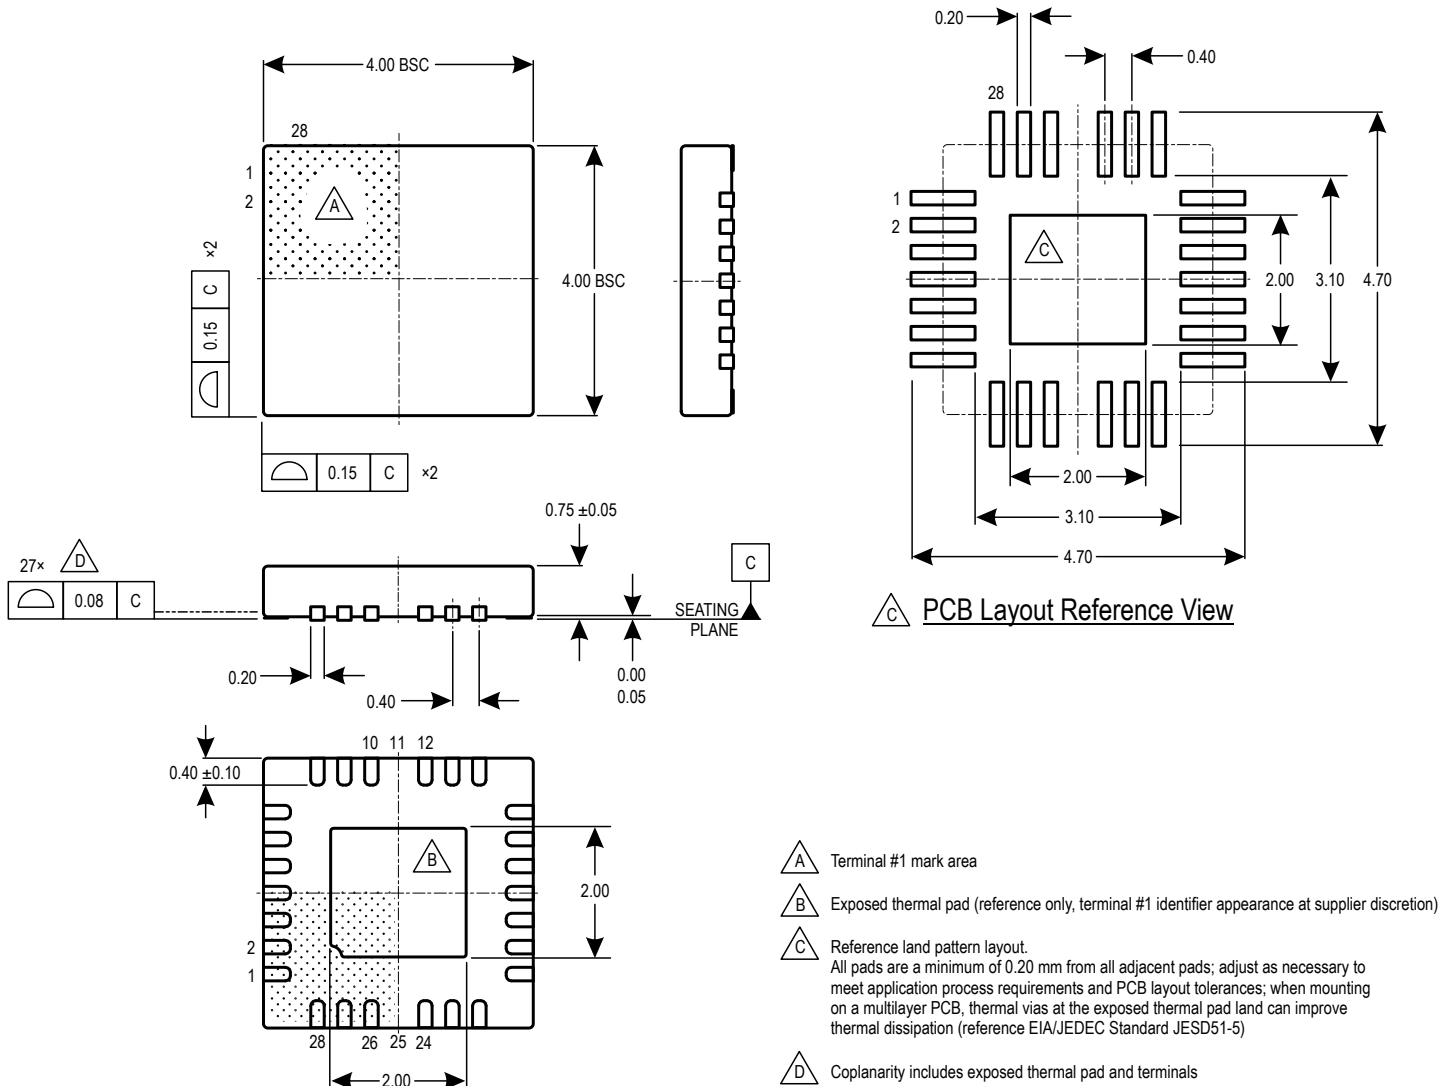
EC Package, 28-Pin QFN with Exposed Pad
